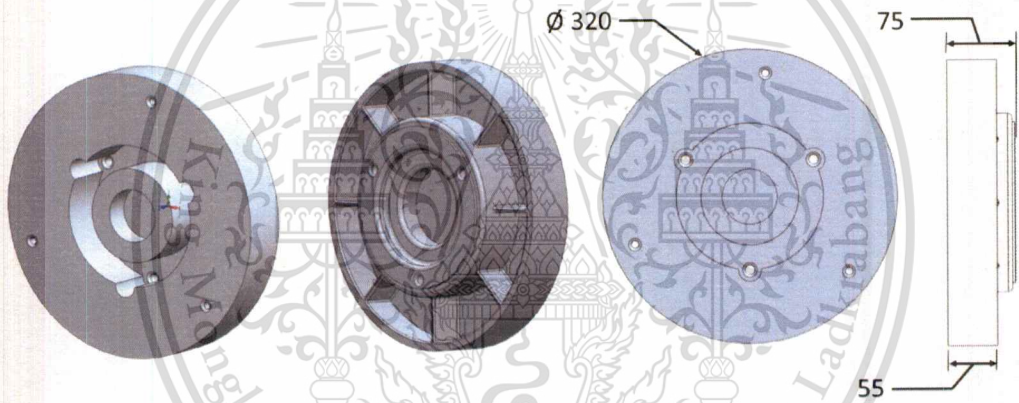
Clutch contact surface prototype CAD model (all dimensions in mm)
